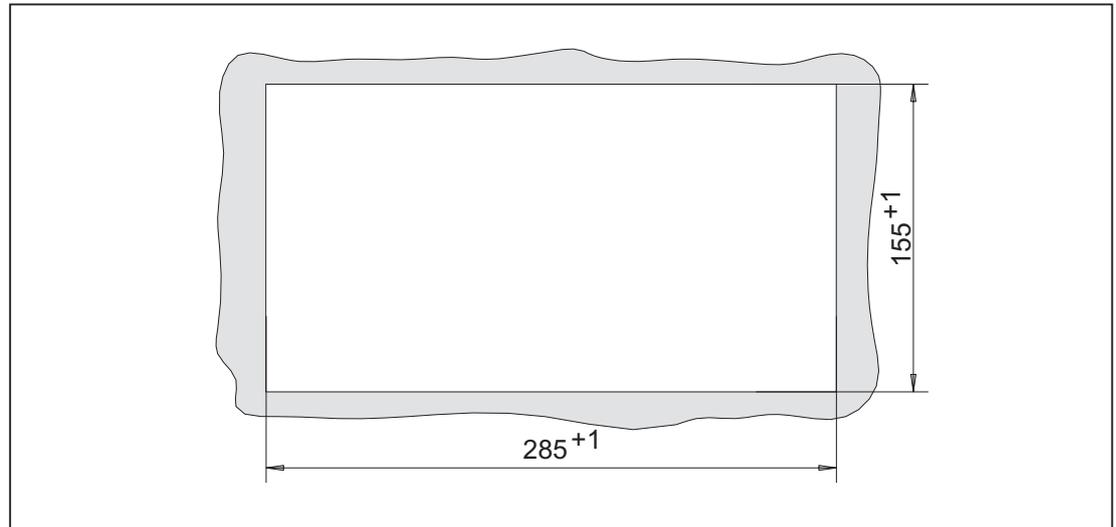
Panel cut-out for machine control panel MCP 310C PN
